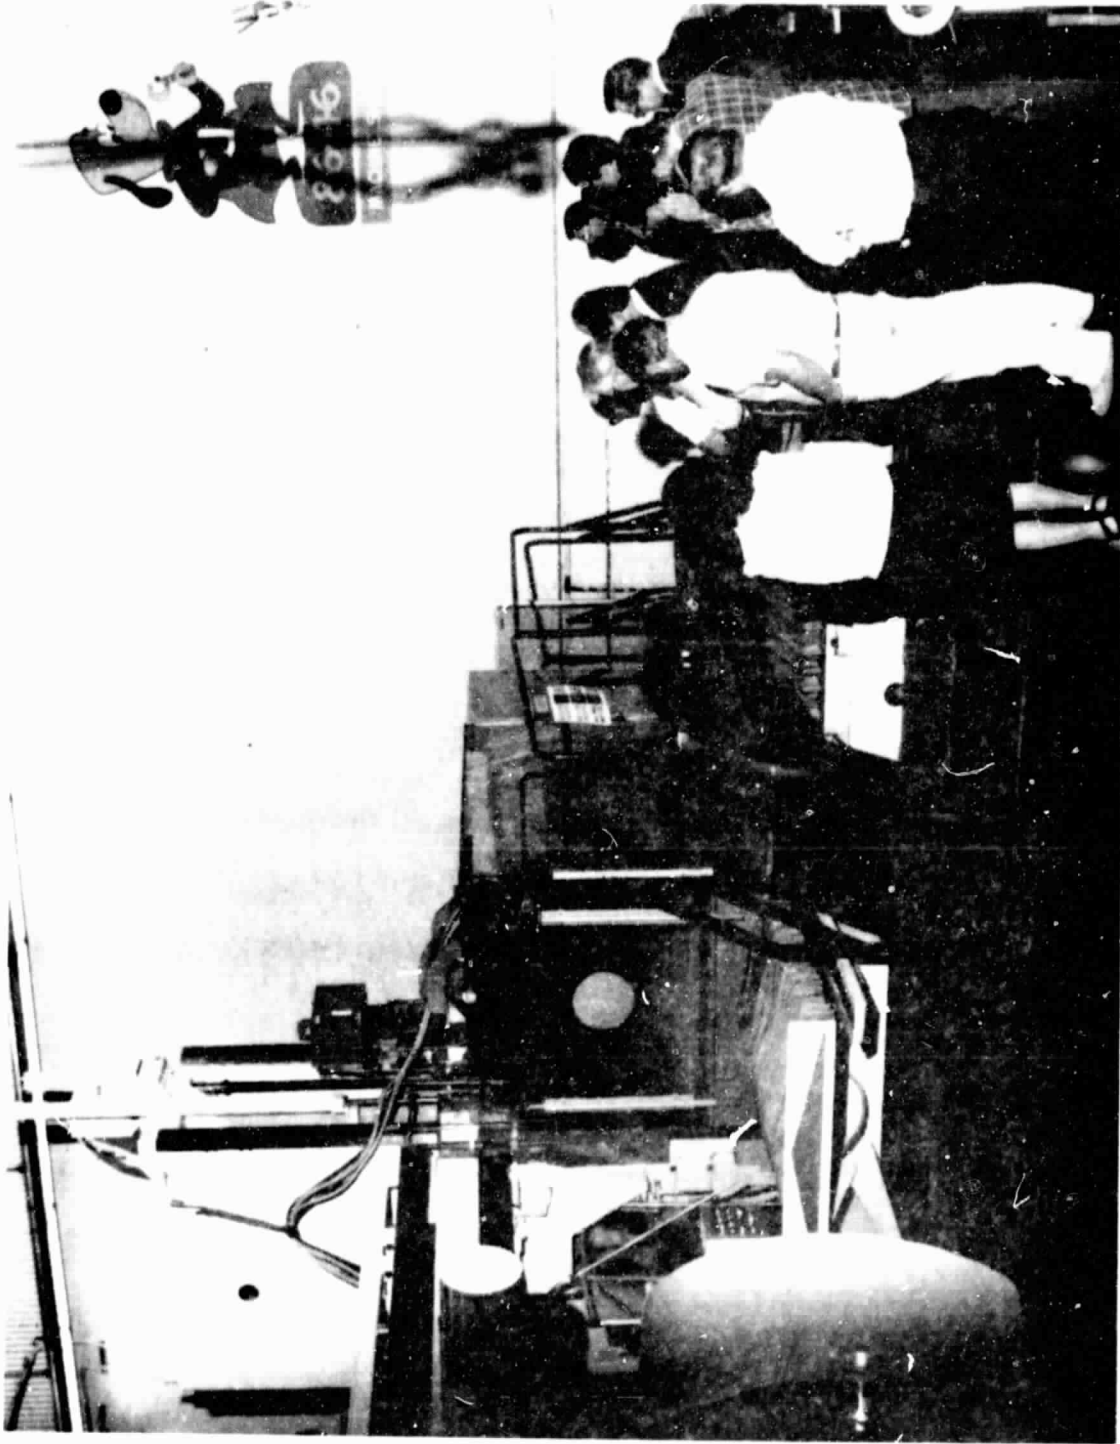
Panel cutting demonstration on Sundstrand OM4 NC machining center.
